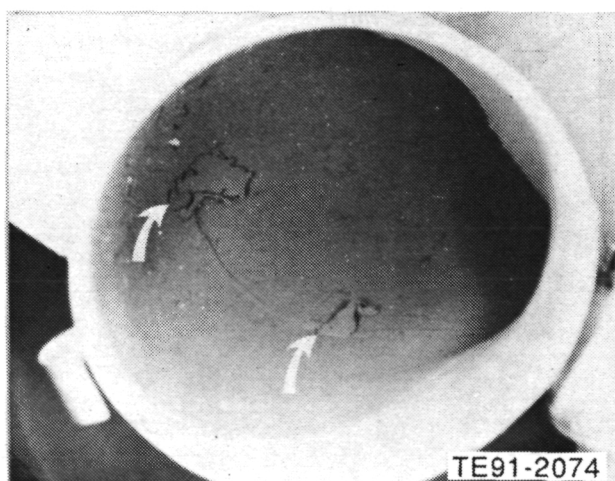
Two pieces of combustor dome welded to I.D. of scroll inlet.
